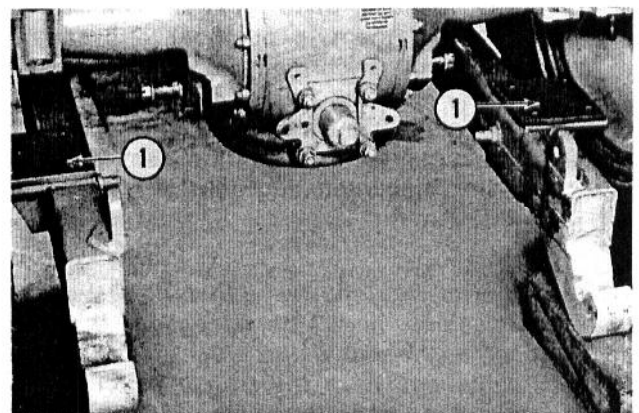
REAR VIEW OF LOADER DETACHED FROM REAR AXLE HOUSINGS
